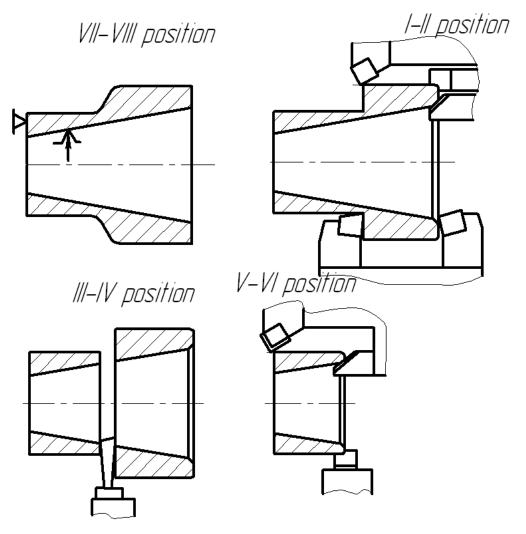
The scheme of the technological process of rings turning from set workpieces [26]
